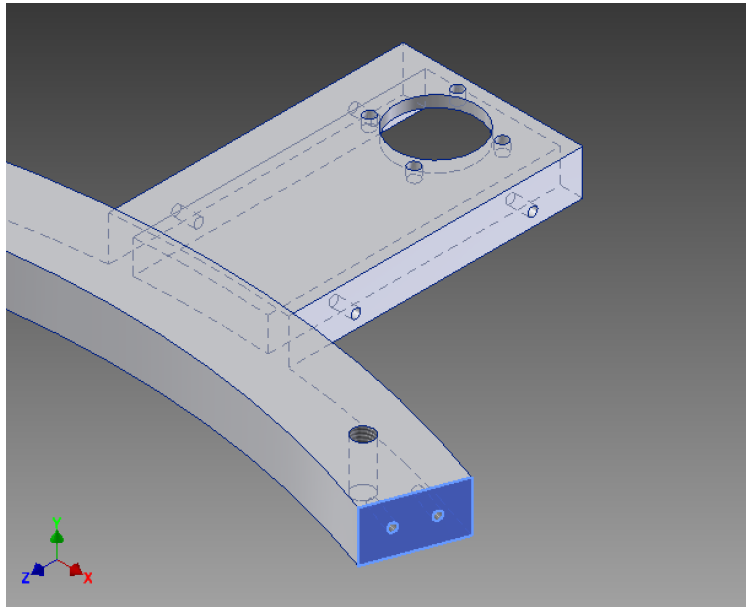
The cross-section of the bottom ring. This view also illustrates the actuator mount point in detail.
